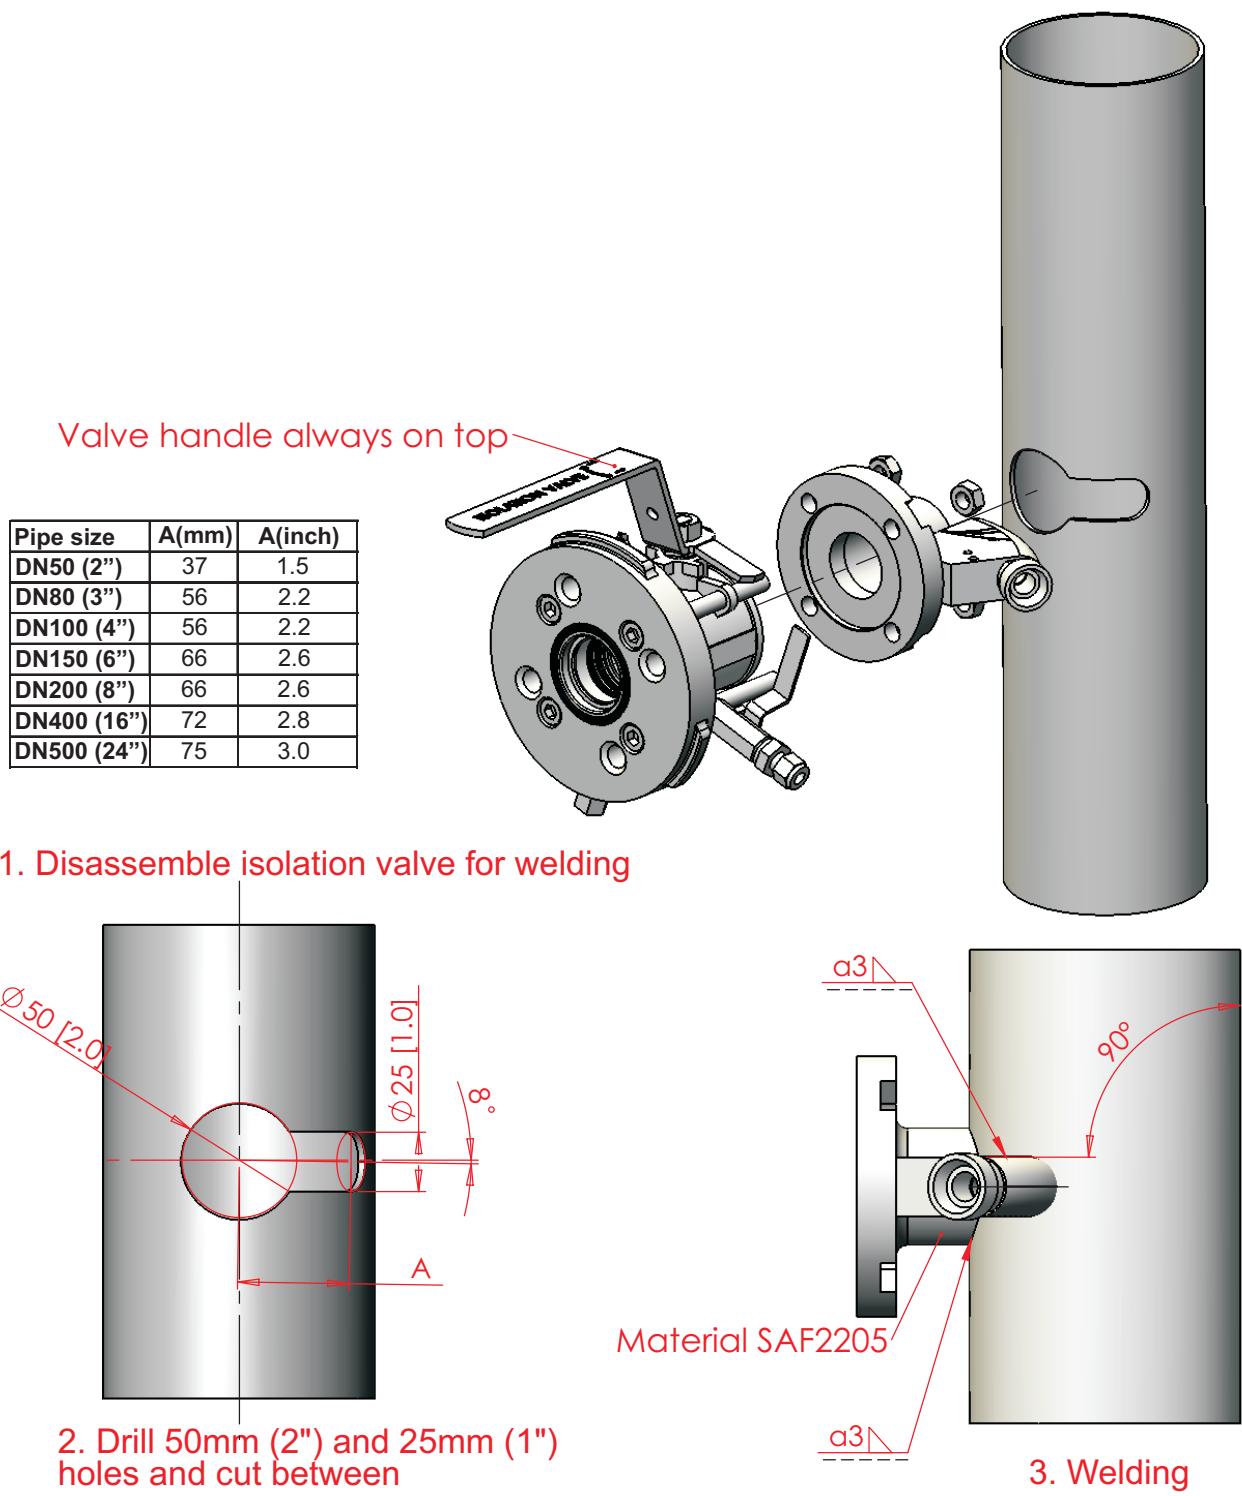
Welding the Safe-Drive™ isolation valve to the pipe
